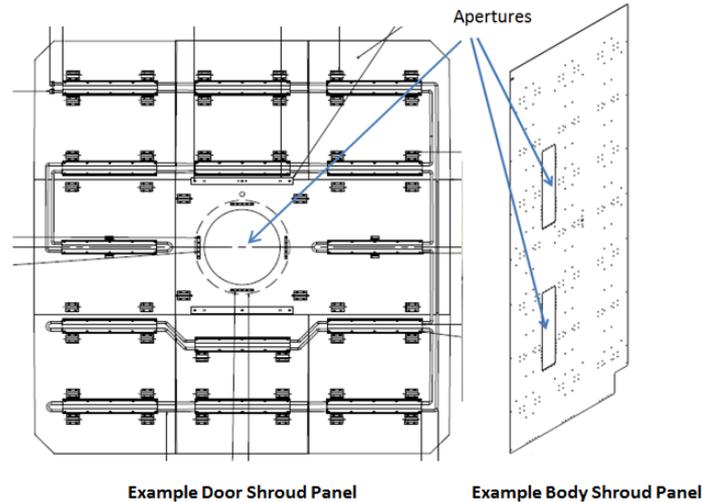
Shroud Panel Apertures – For Illustrative Purposes Only
